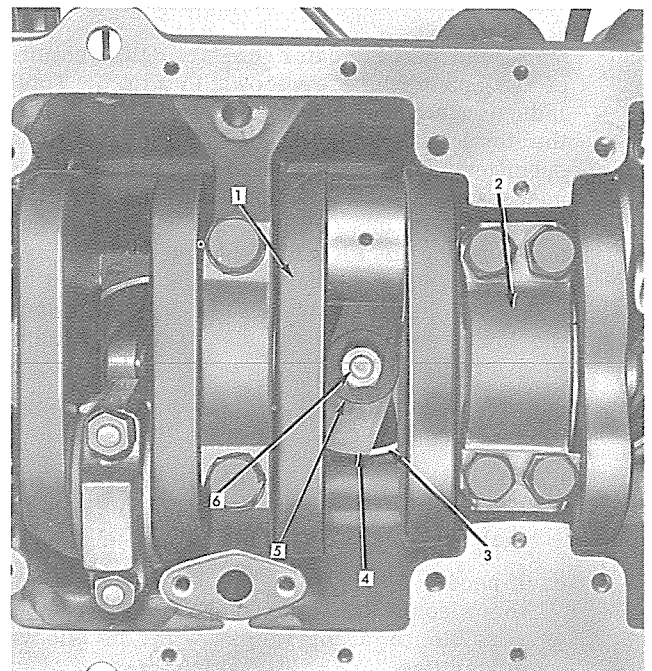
Removing Cylinder Sleeve — Bottom View
